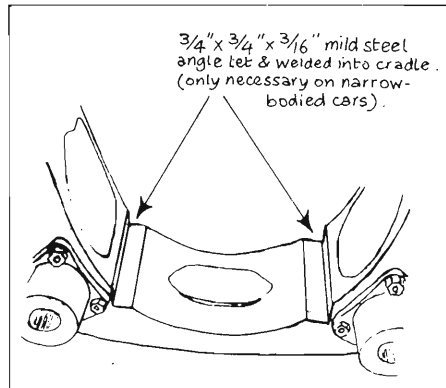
Modification to cradle. (On narrow bodied cars only.)
